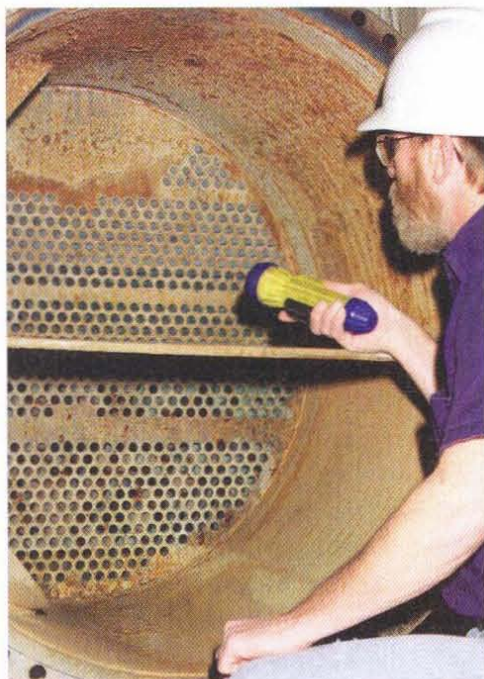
Repairs made to a heat exchanger tube-to-tubesheet joint are classified as pressure vessel repairs because they involve welding directly on a pressure boundary of the heat exchanger.
